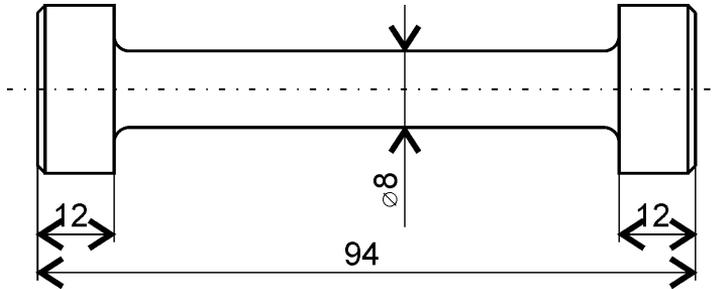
Geometry of specimen for thermo-mechanical fatigue test
